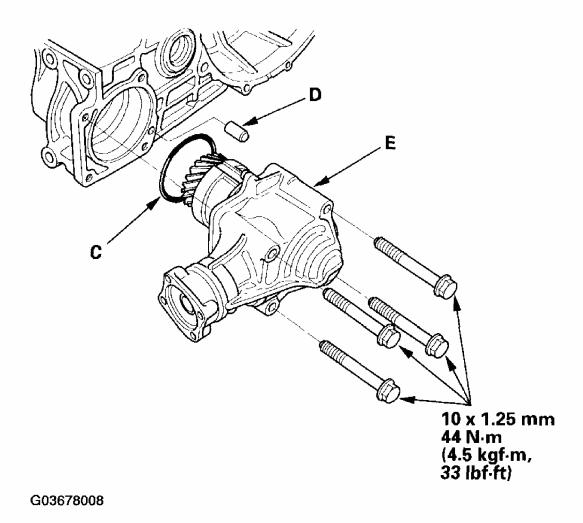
Installing New O-Ring, 20mm Dowel Pin And Transfer Assembly With Specified Torques
